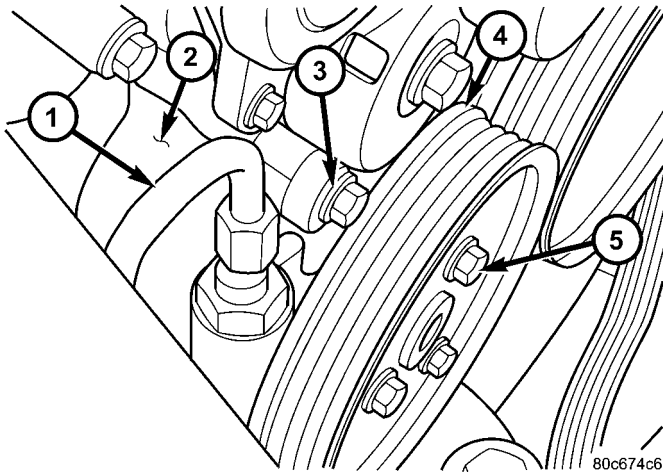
POWER STEERING PUMP - 2.5 DIESEL
